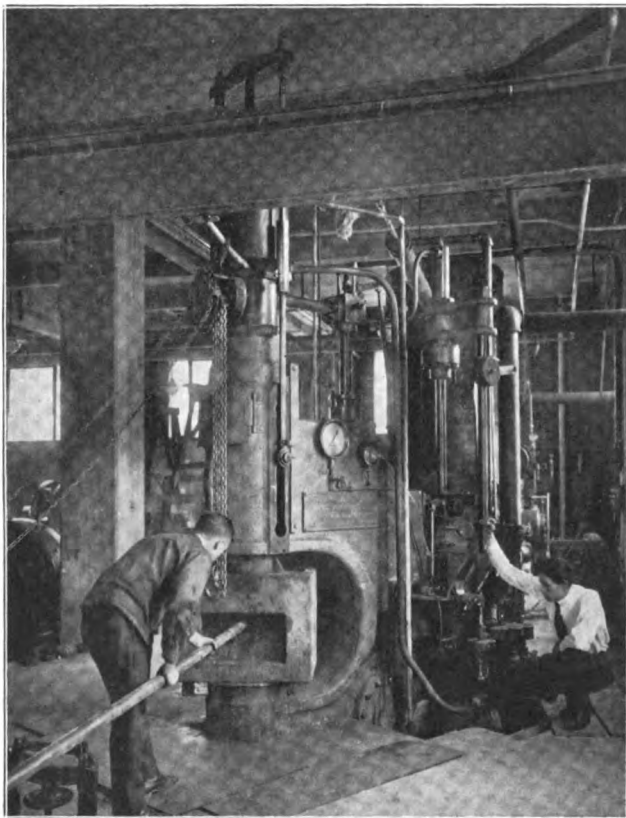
150-ton steam hydraulic forging press in laboratory of Bureau of Standards.
